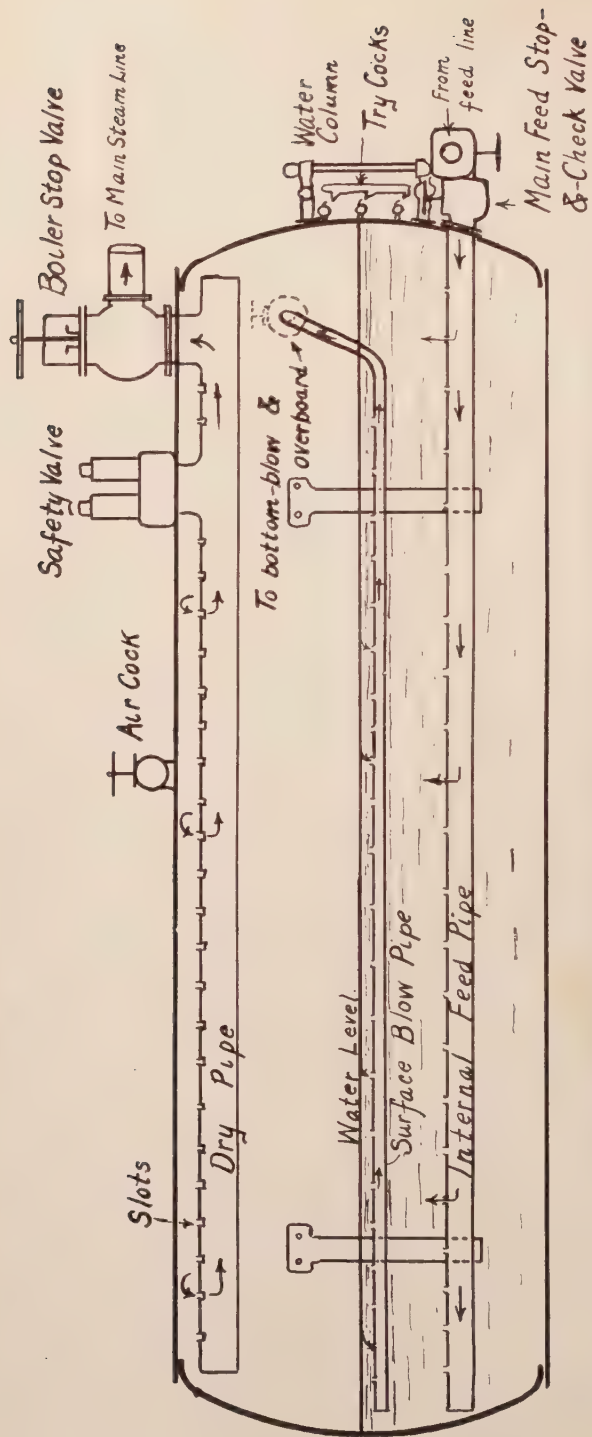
The location of the various fittings attached to the steam drum of a boiler is shown in Figures III-4 and III-5.
